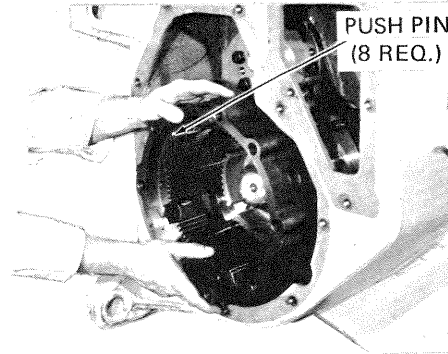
REASSEMBLY AND INSTALLATION OF OIL BRAKE ASSEMBLY,
